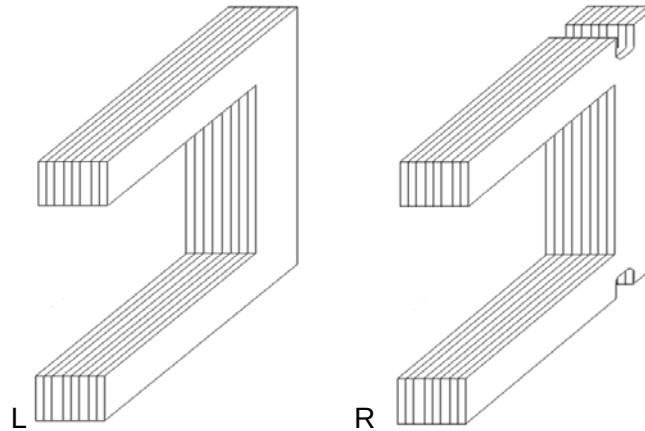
Stator Tooth C-Core: Air Space for Valley (L), Slots for Mech. Attachment (R)
